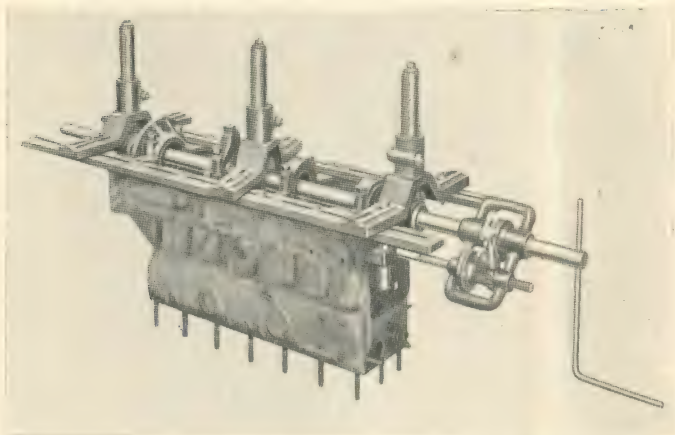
CUTHBERT MAIN BEARING BORING MACHINE
